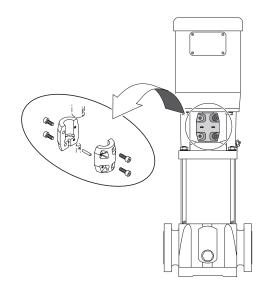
Remove the Socket Head Screws and the Coupling Halves
